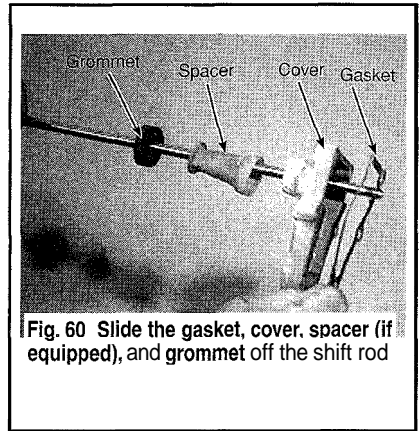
Slide the gasket, cover, spacer (if equipped), and grommet off the shift rod
